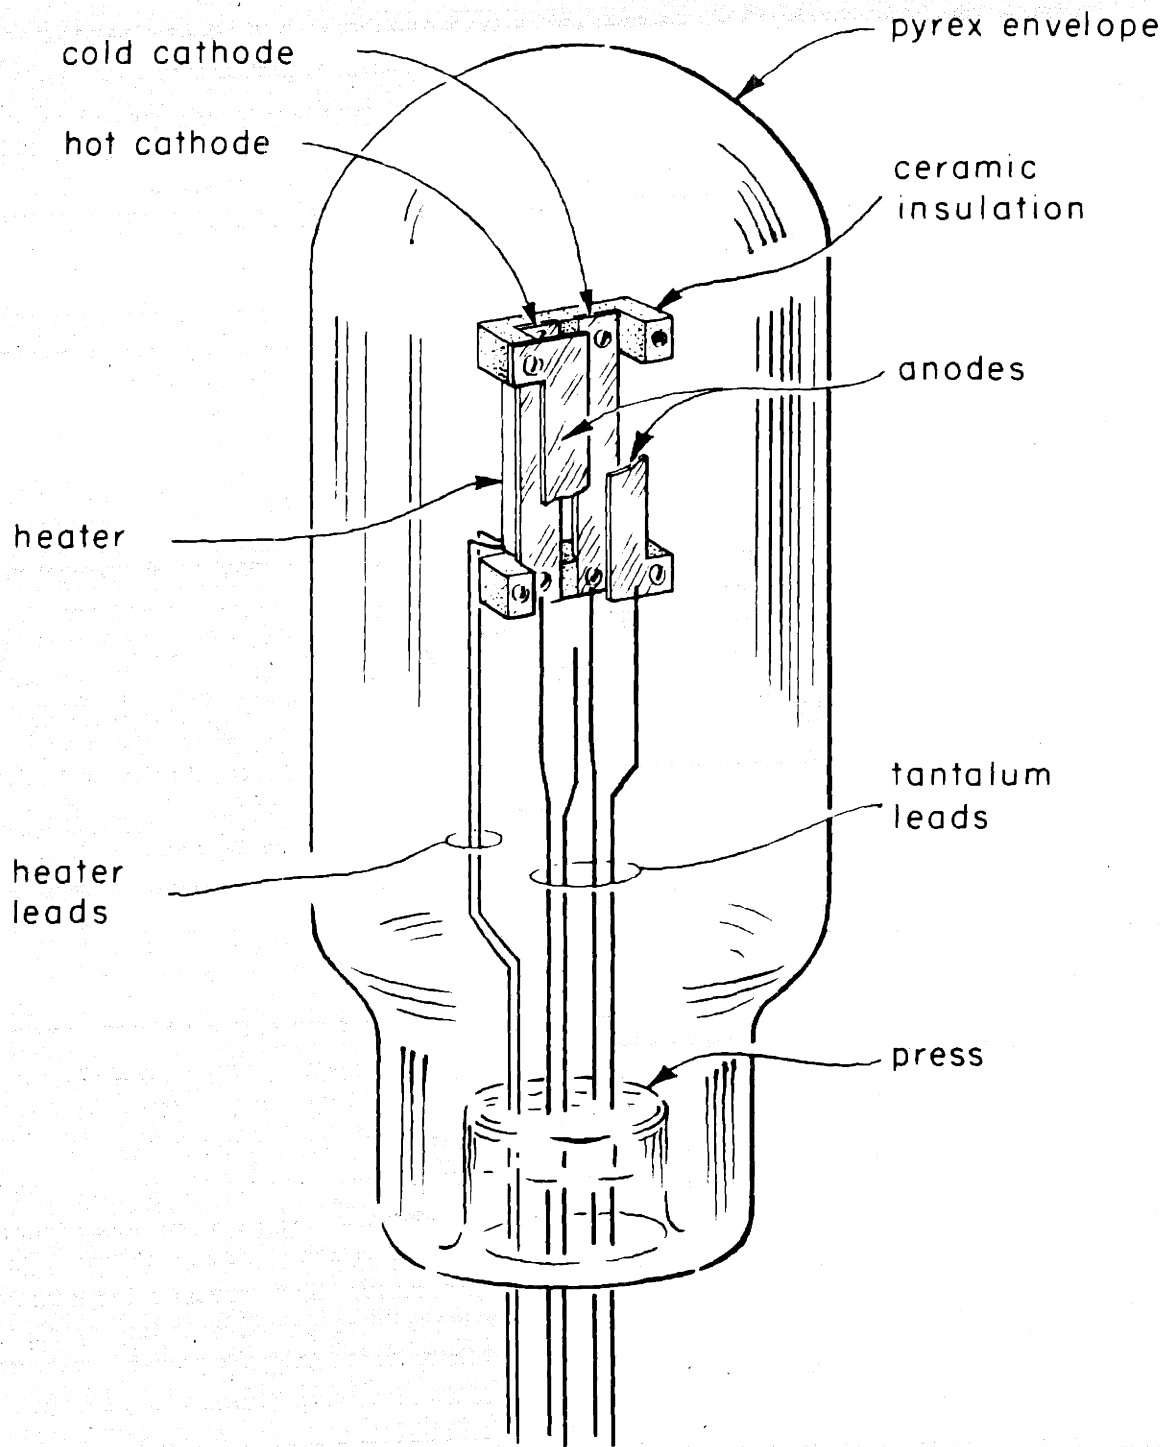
MODEL 1 ASSEMBLED TUBE
